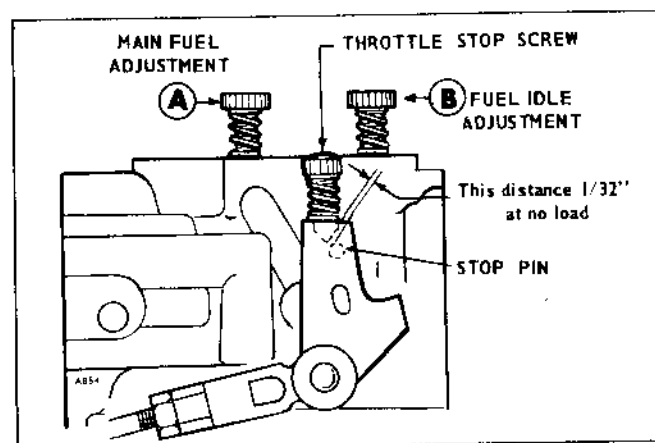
Throttle Stop Screw Adjustment (Spec A)
